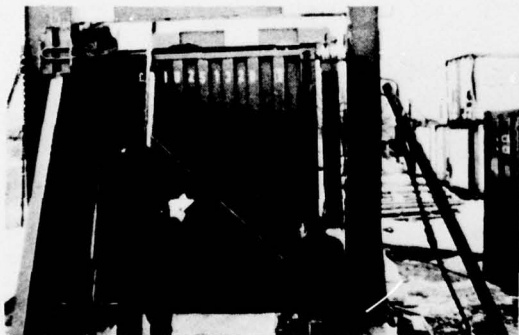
Diagonal Measurement During Racking Test - Hydraulic Cylinder Pushing Against Upper Right Corner Fitting Producing Transverse Racking To The Left
